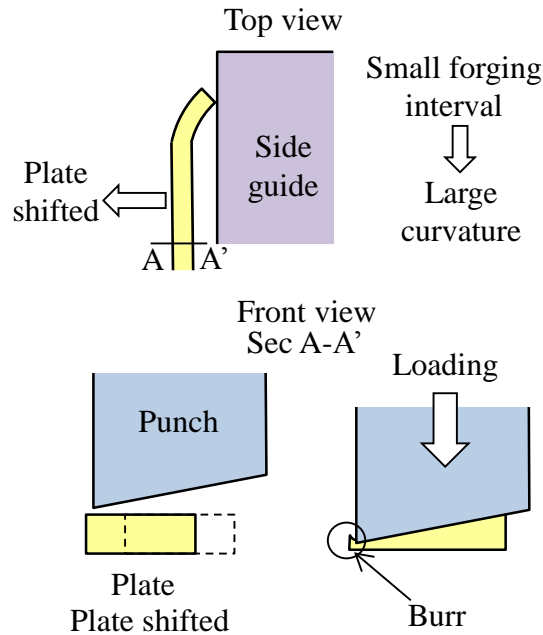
Burr formation on side of stainless steel plate having inclined cross-section.
